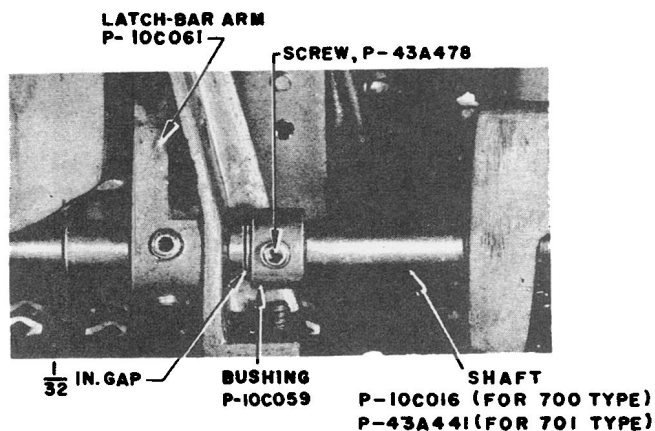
Side-by-side Assembly, Mechanical Linkage
